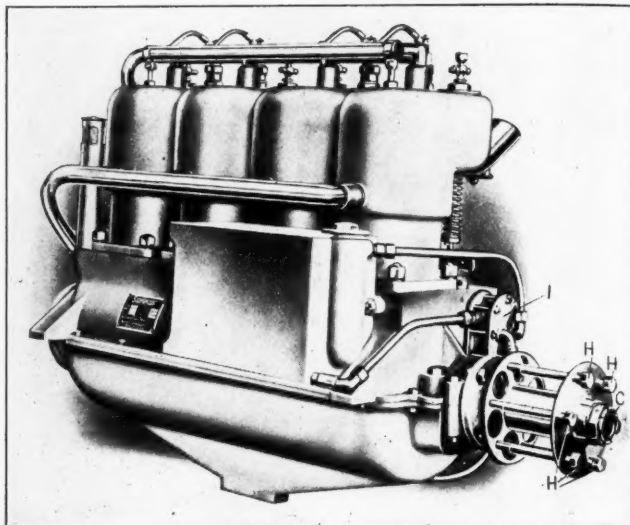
Rear View of Four-cylinder Motor showing Method of Attaching Propeller
